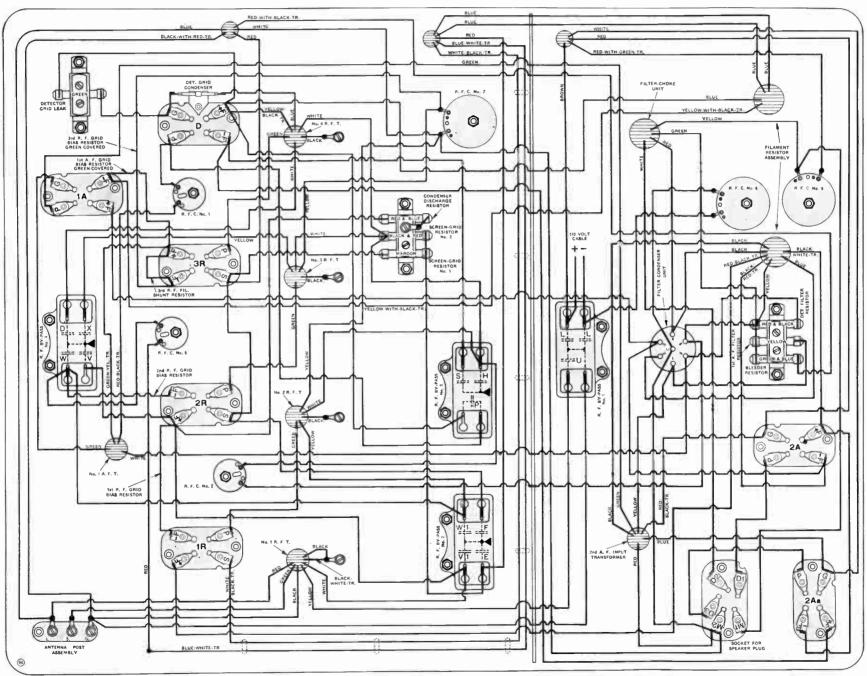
Bottom Wiring of Type D-2 Chassis.
